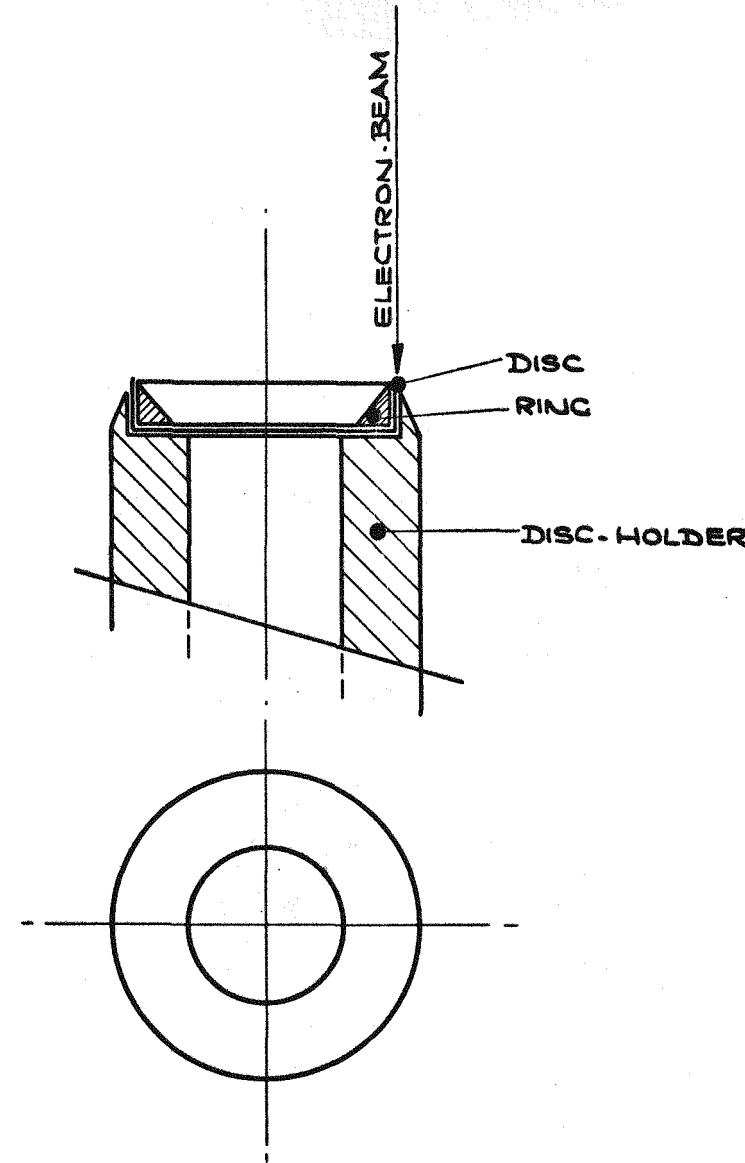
EDGE WELD WITH CHAMFERED RING
